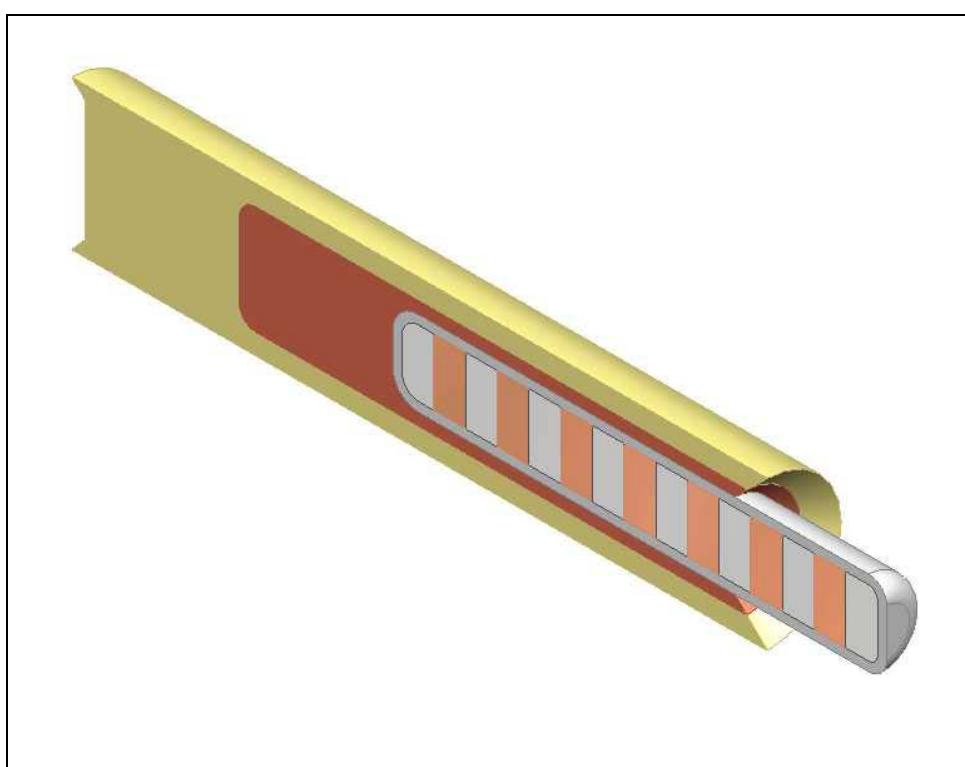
Assembly picture with 8 segments in a reduced length sabot
